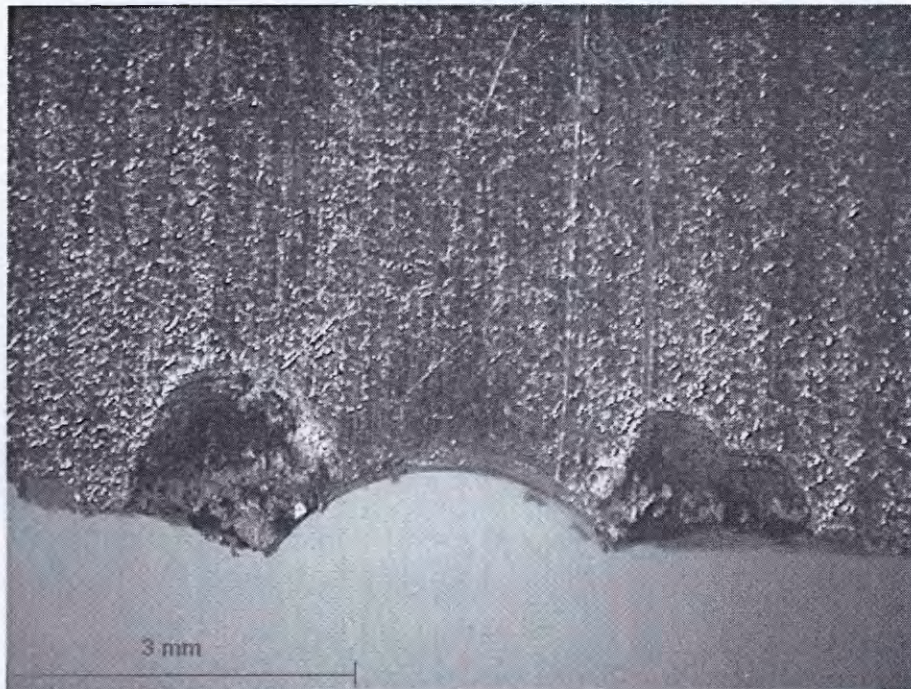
Lateral fracture surface from testing configuration 2 (Table 6.1.1)
